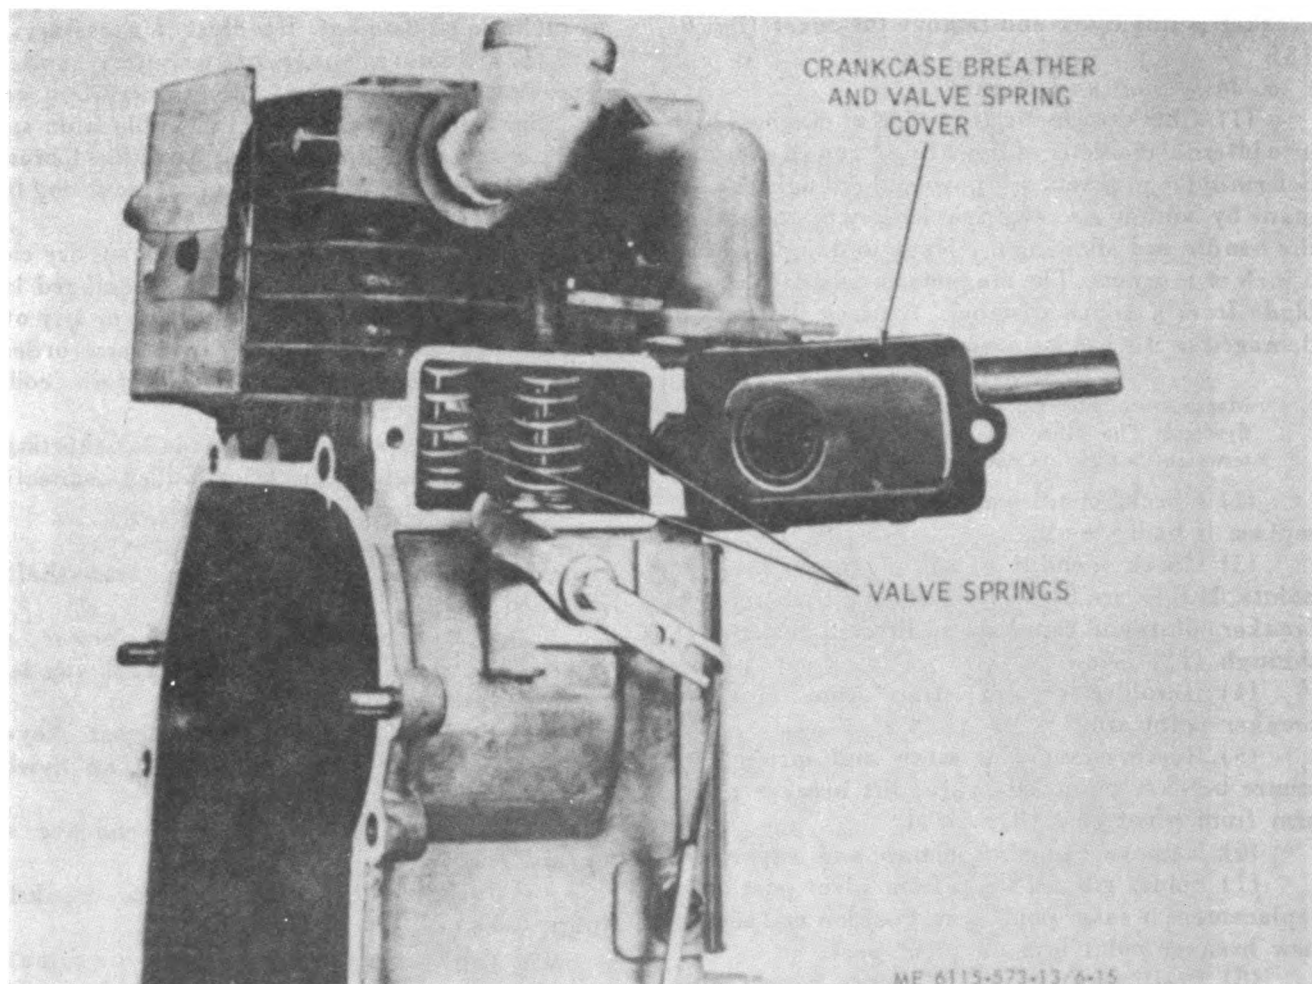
Partial disassembly of engine showing access to valve springs.
